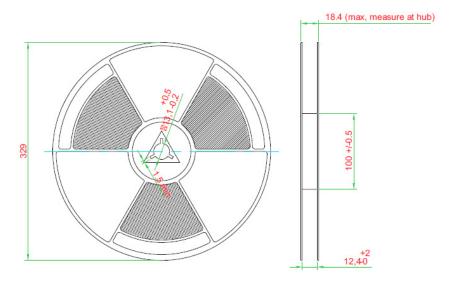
Reel dimensions for LUXEON 3535L Color Line.
